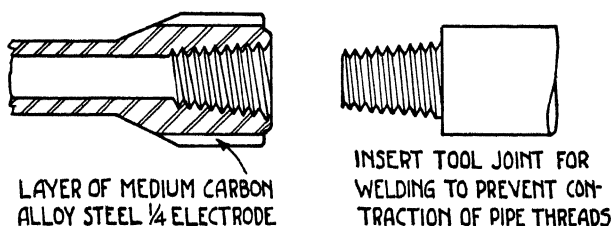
Set-up for building up worn hydril drill pipe—first method.
